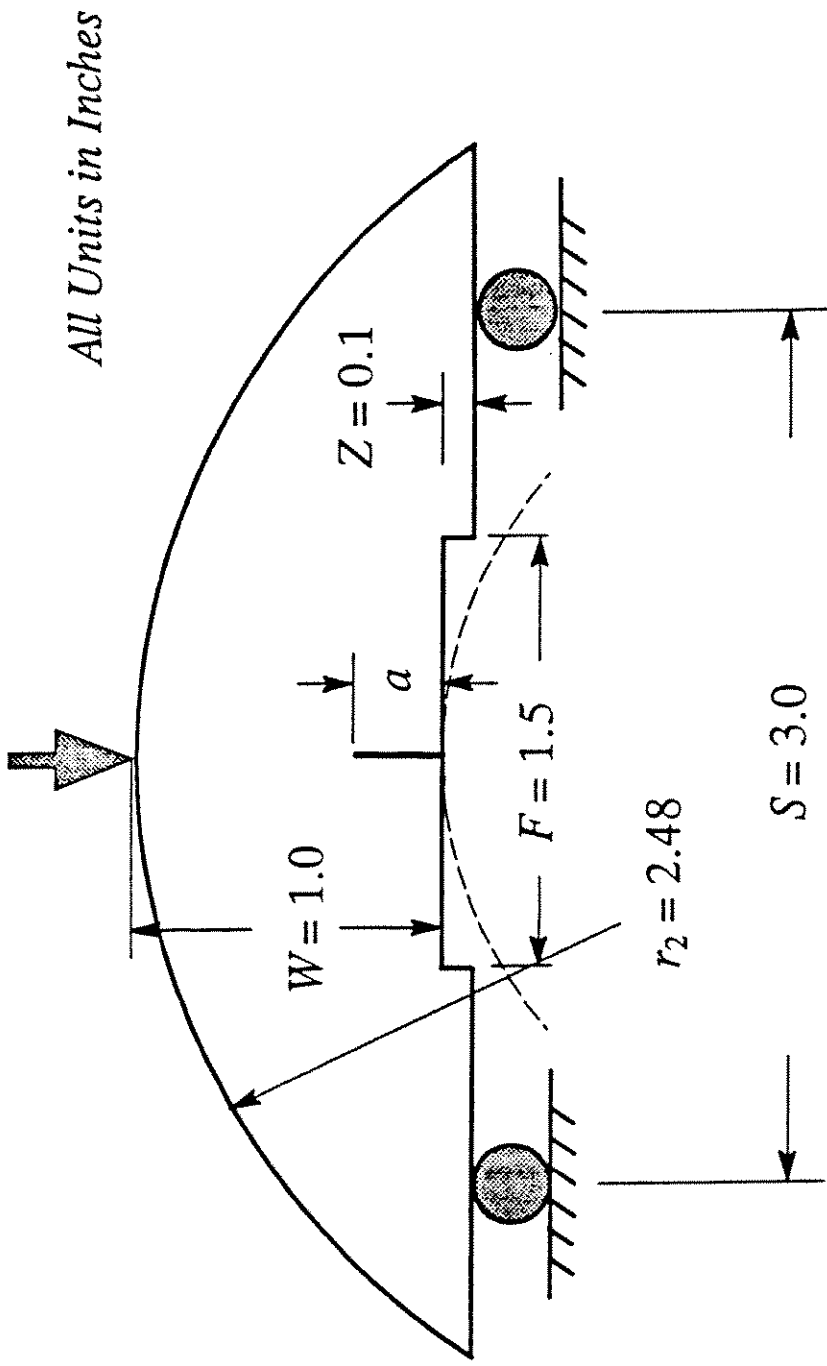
SENAB Specimen for Pipe Material "M2" with Machined Slot
